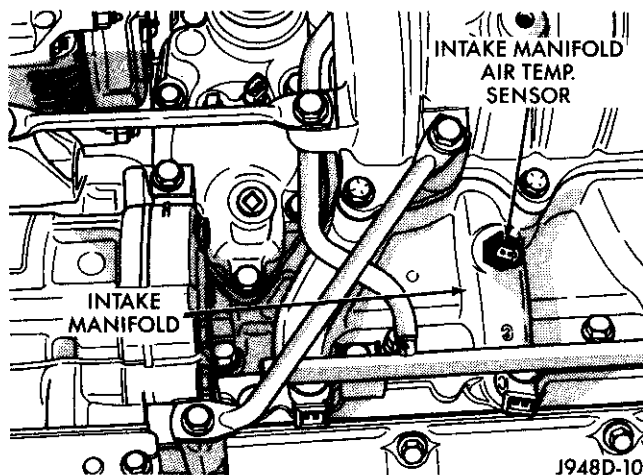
Intake Manifold Air Temperature Sensor—8.0L Engine
